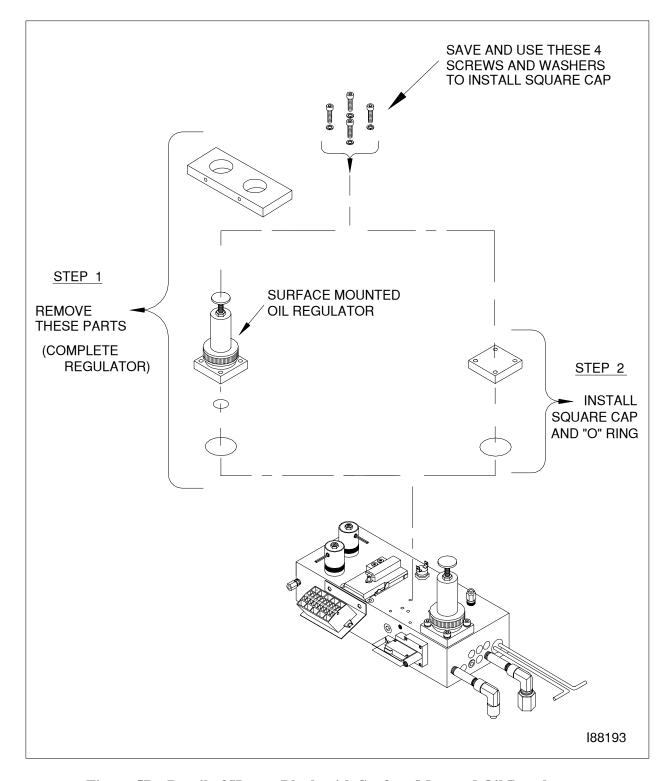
B - Detail of Heater Block with Surface-Mounted Oil Regulator
